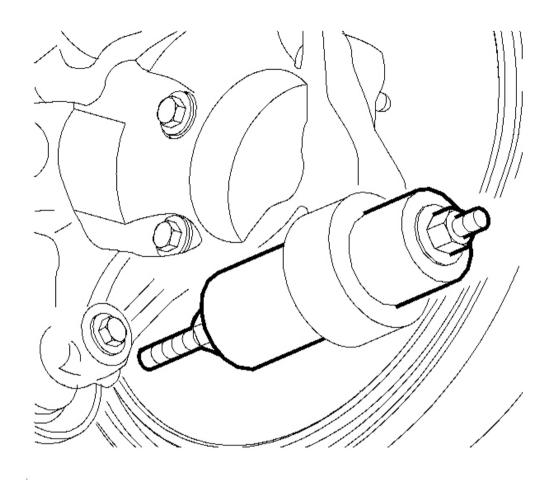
Lower Control Arm Bushing & Knuckle Assembly Courtesy of GENERAL MOTORS CORP.
